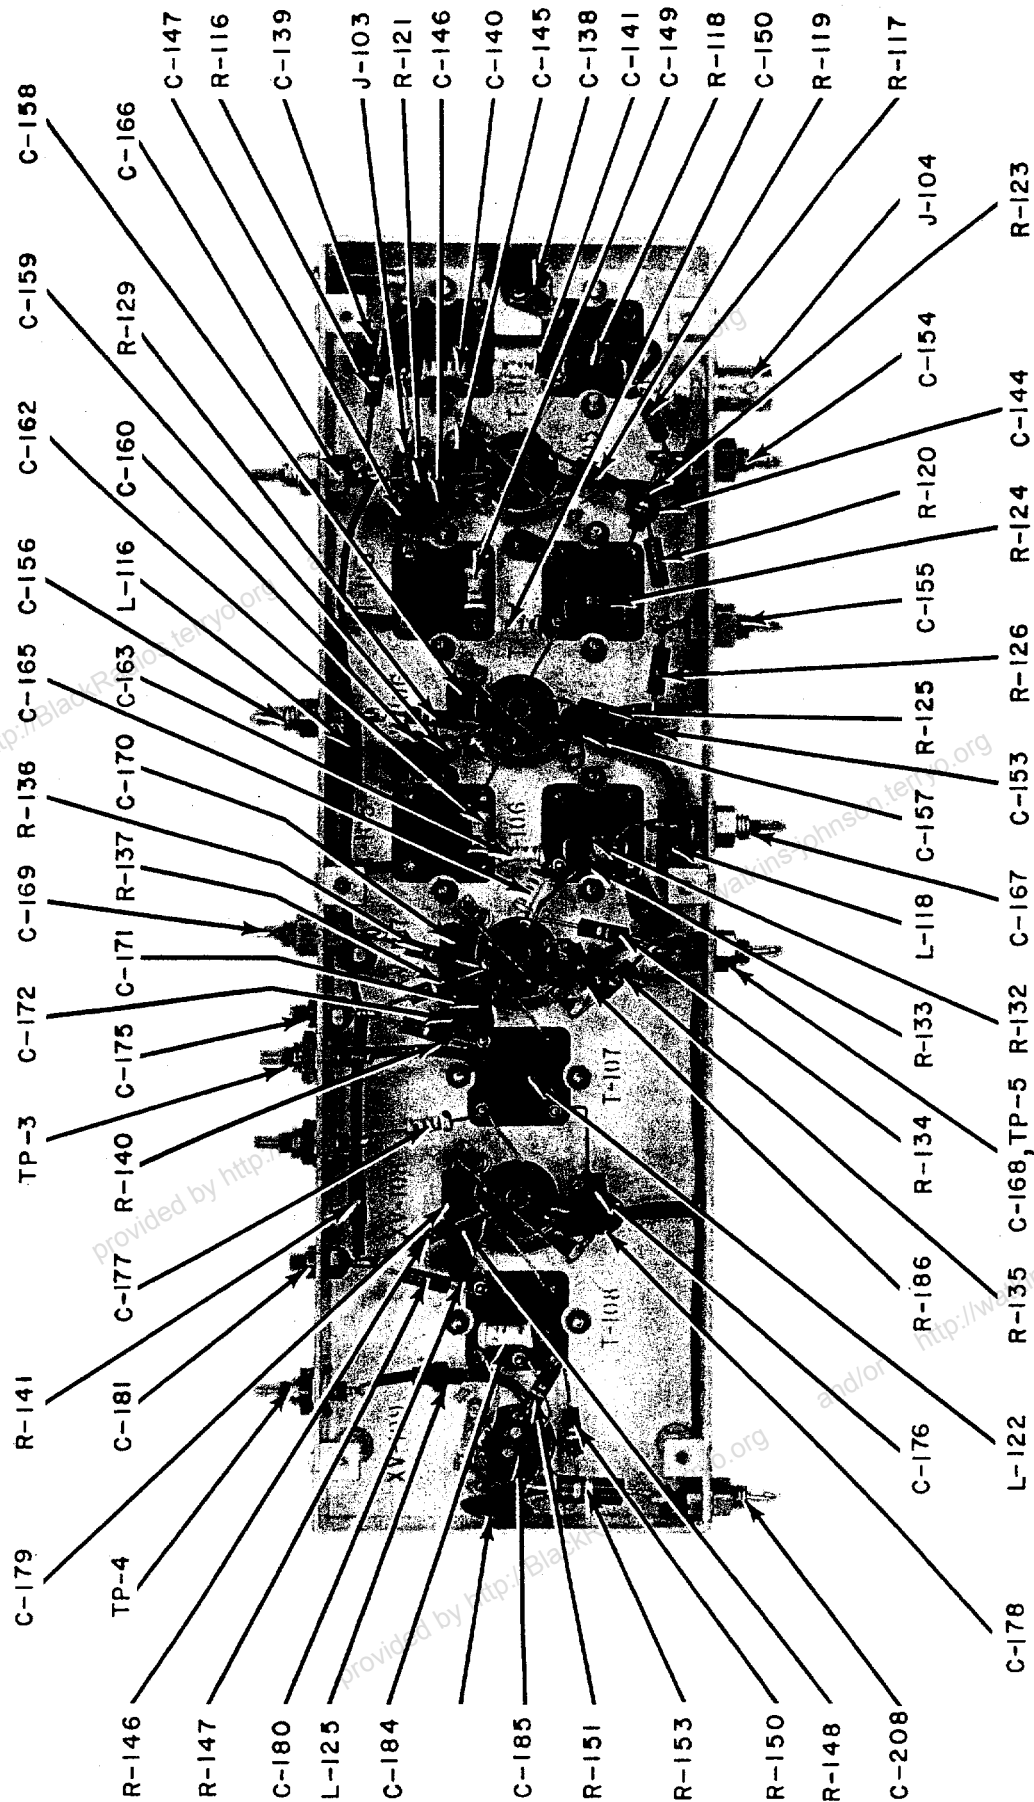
IF Strip, Models 1501-1502 Receiver, Bottom View (Dust Cover Removed)
